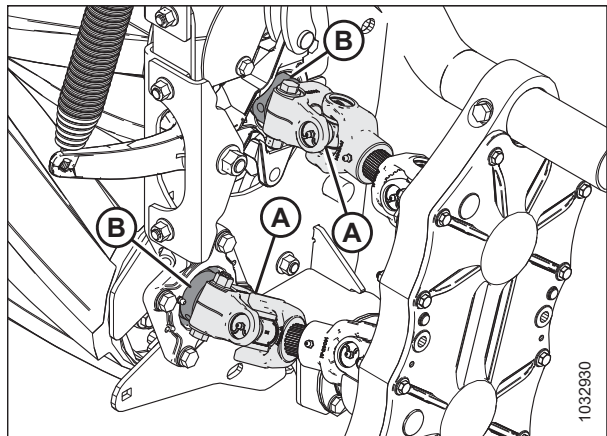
Conditioner Drive U-Joints and Conditioner Roll Right Bearings
